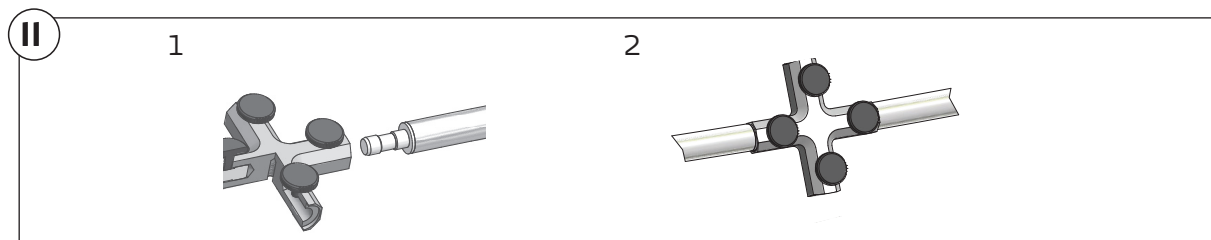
First step of the assembly of the B-layer: Connecting poles, 2-pole and 4-pole connecting pieces into a complete circle.
